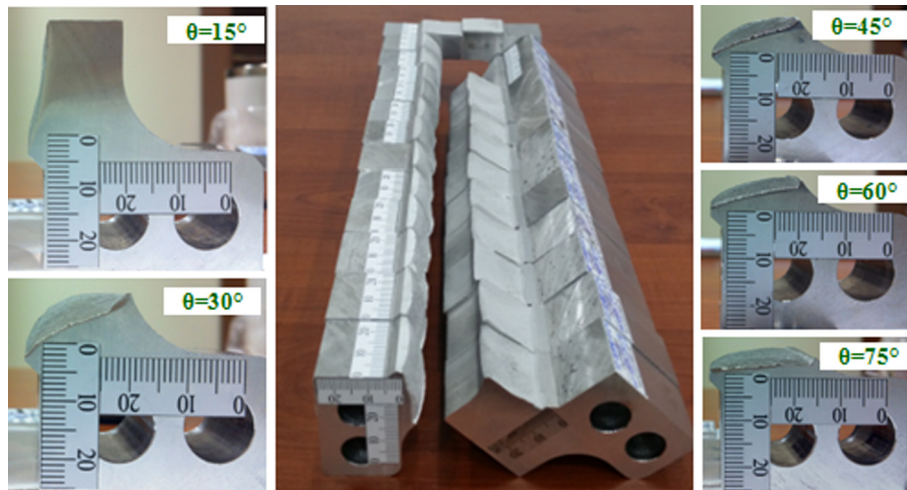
Broken sample pictures and fracture surfaces of T-specimen for different loading angles.
